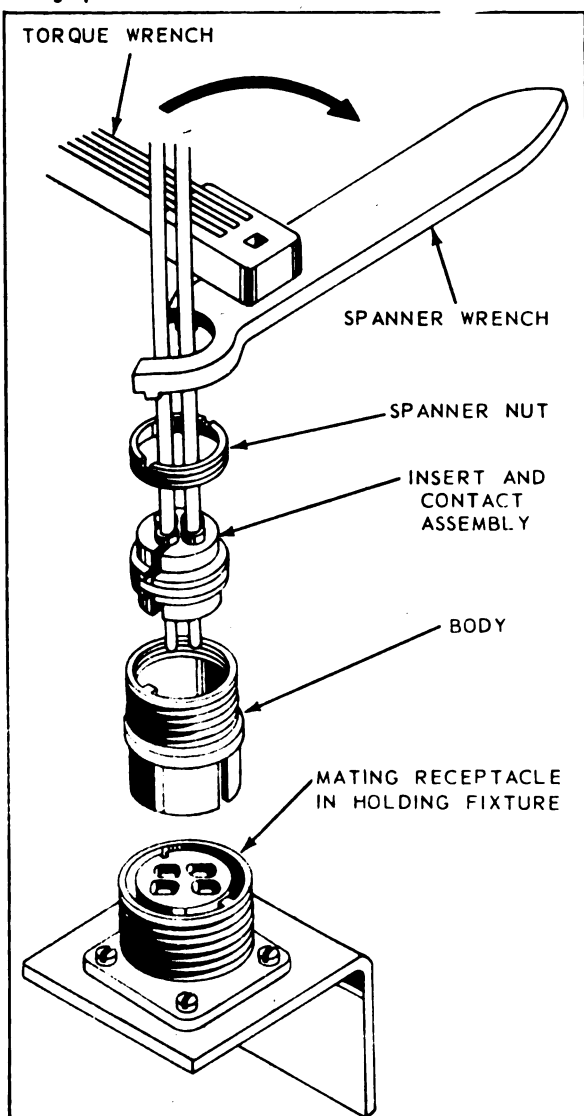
Torque Wrench Used on Bendix Fireproof Connector
